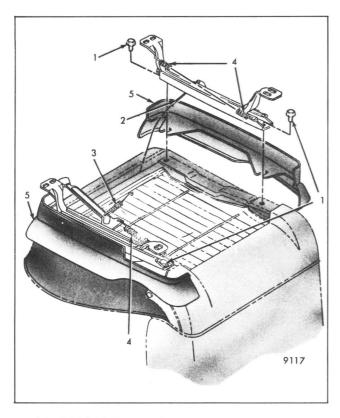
"A" Body Bucket Seat Manually Operated Adjusters
